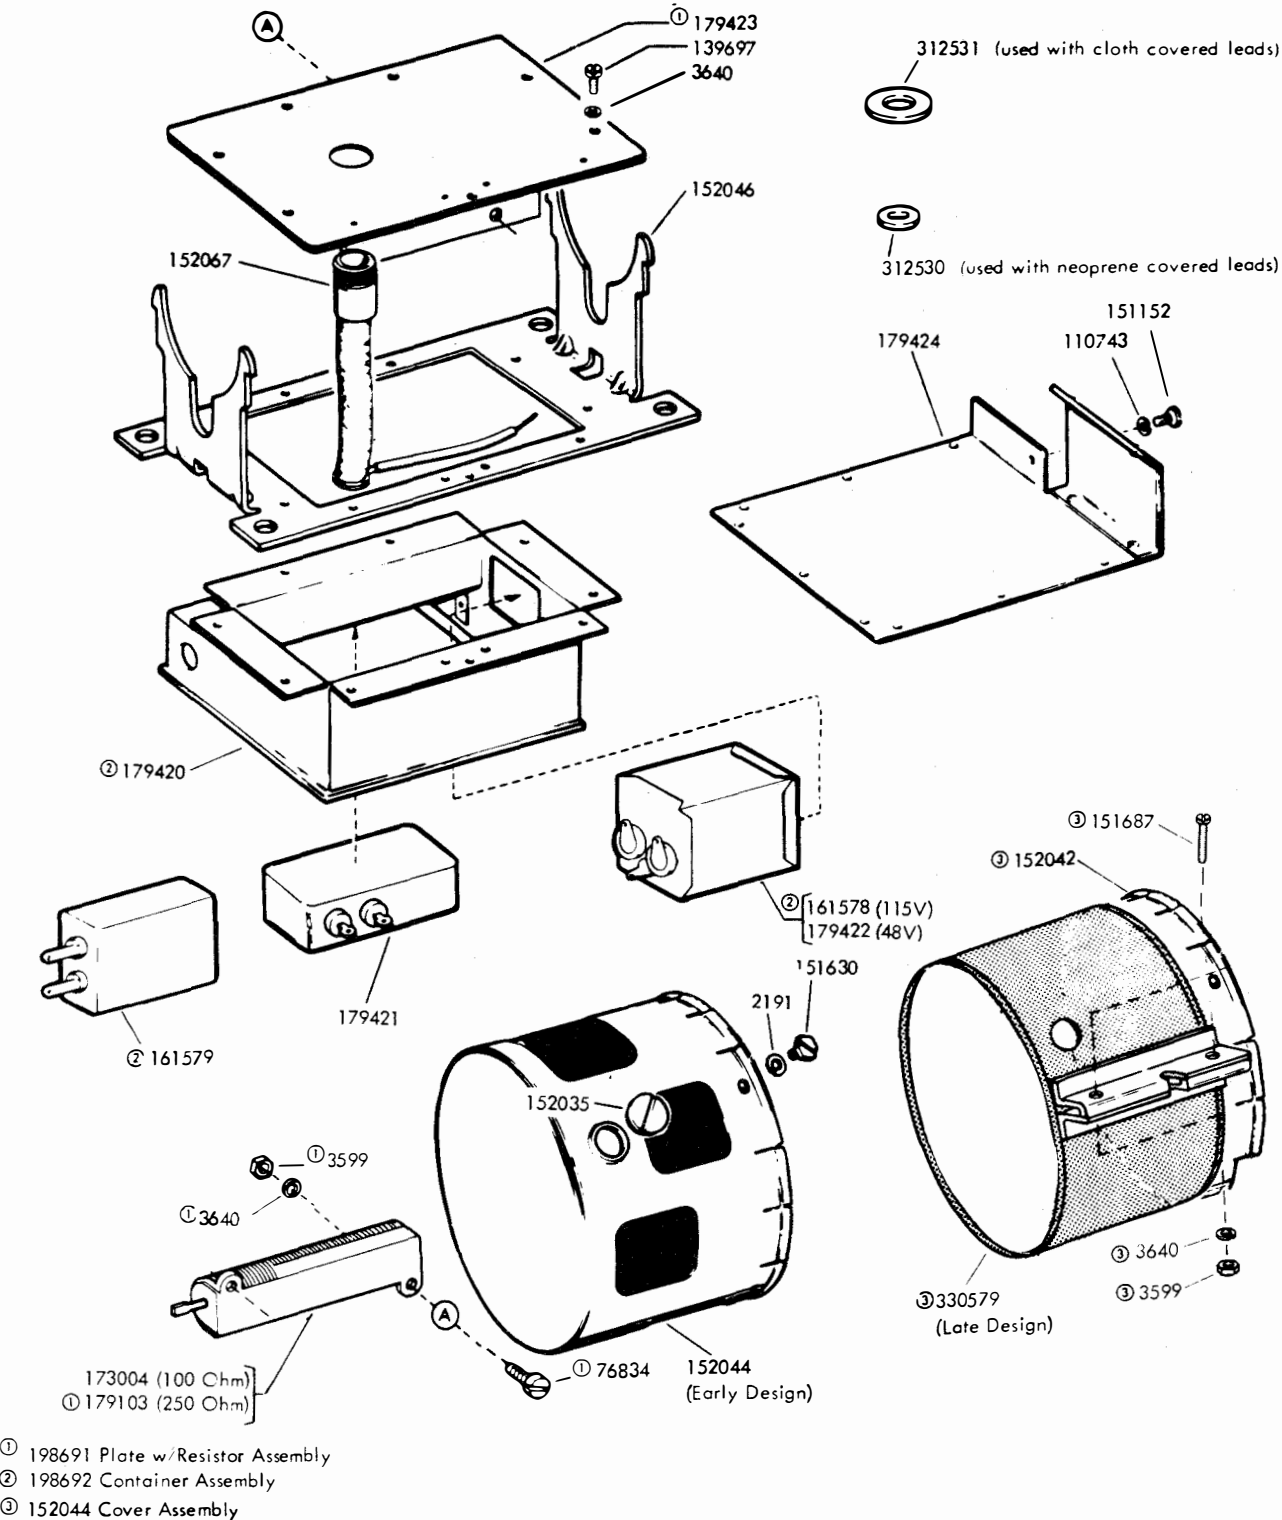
Series Motor Mounting Parts with RF Suppression - Used on LMU41
